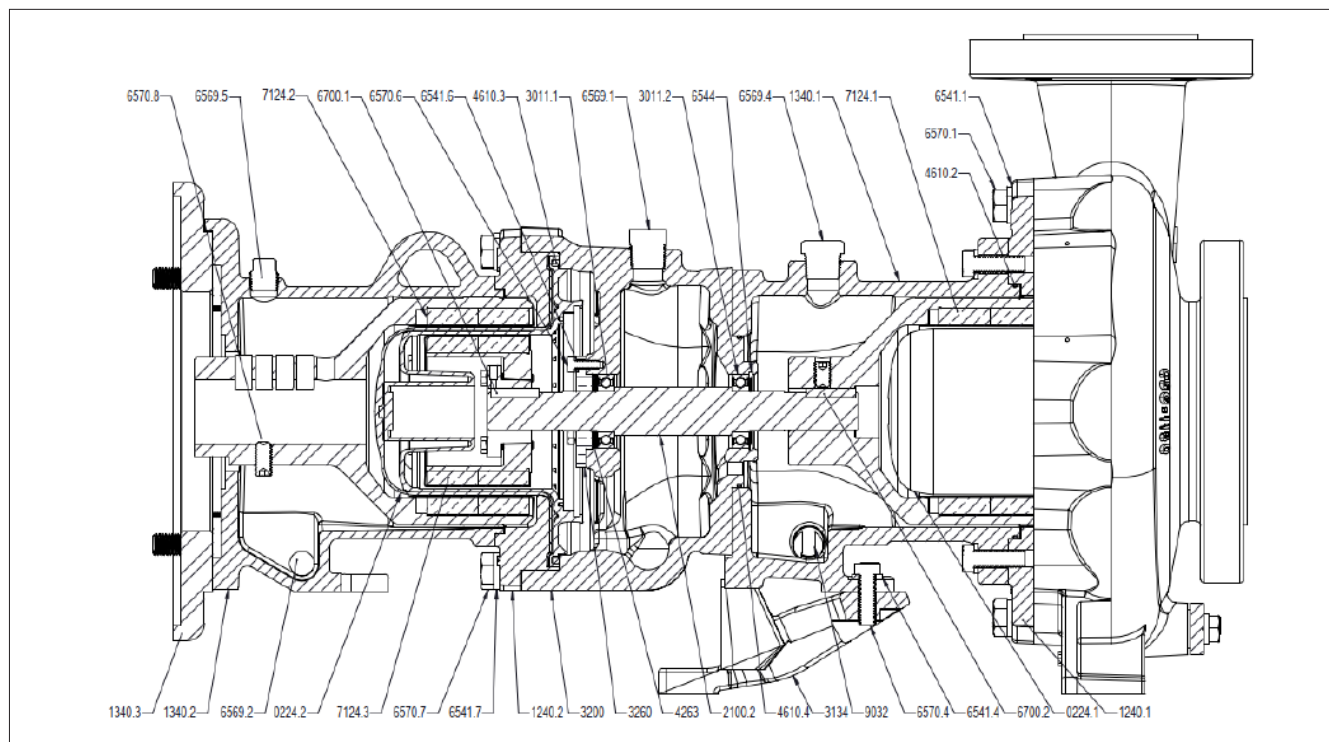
Sectional Drawing Dual Drive B/C/F/G sizes.
